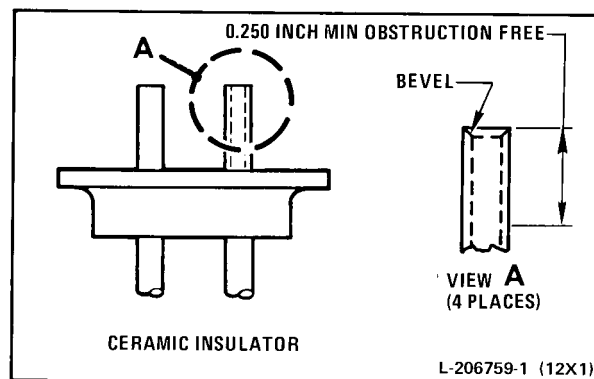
Installation of Lead Wires Into Insulator Assembly (Sheet 2 of 6)
